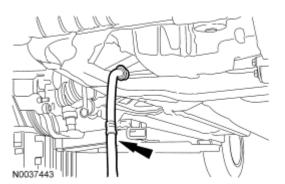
Locating Power Steering Pressure (PSP) Tube Courtesy of FORD MOTOR CO.
